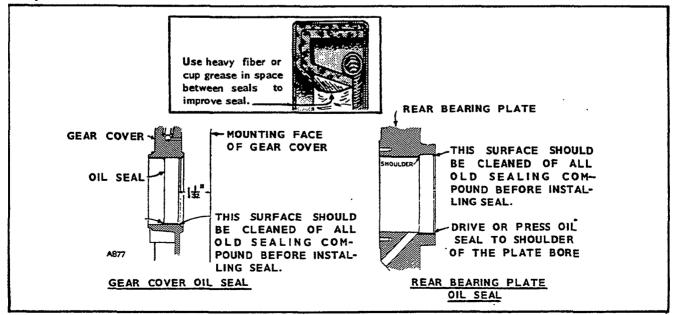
GEAR COVER AND REAR BEARING PLATE OIL SEALS
